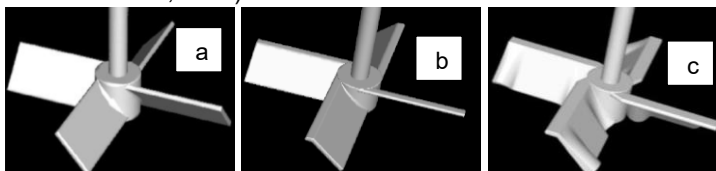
PBT Impeller (a); M3 Impeller (b); Moud Impeller (3).
